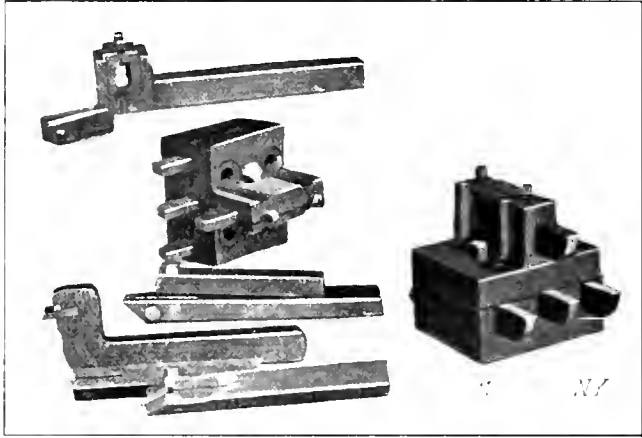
Miscellaneous Inserted Cutter, Planer Tools
